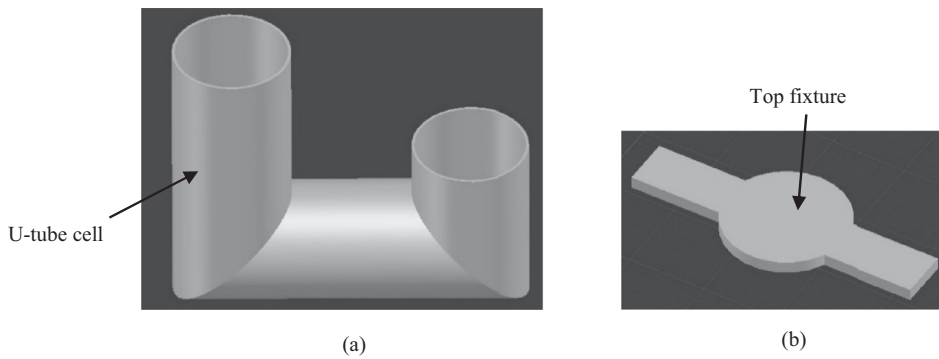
CAD model (a) U-tube cell (b) fixture.
